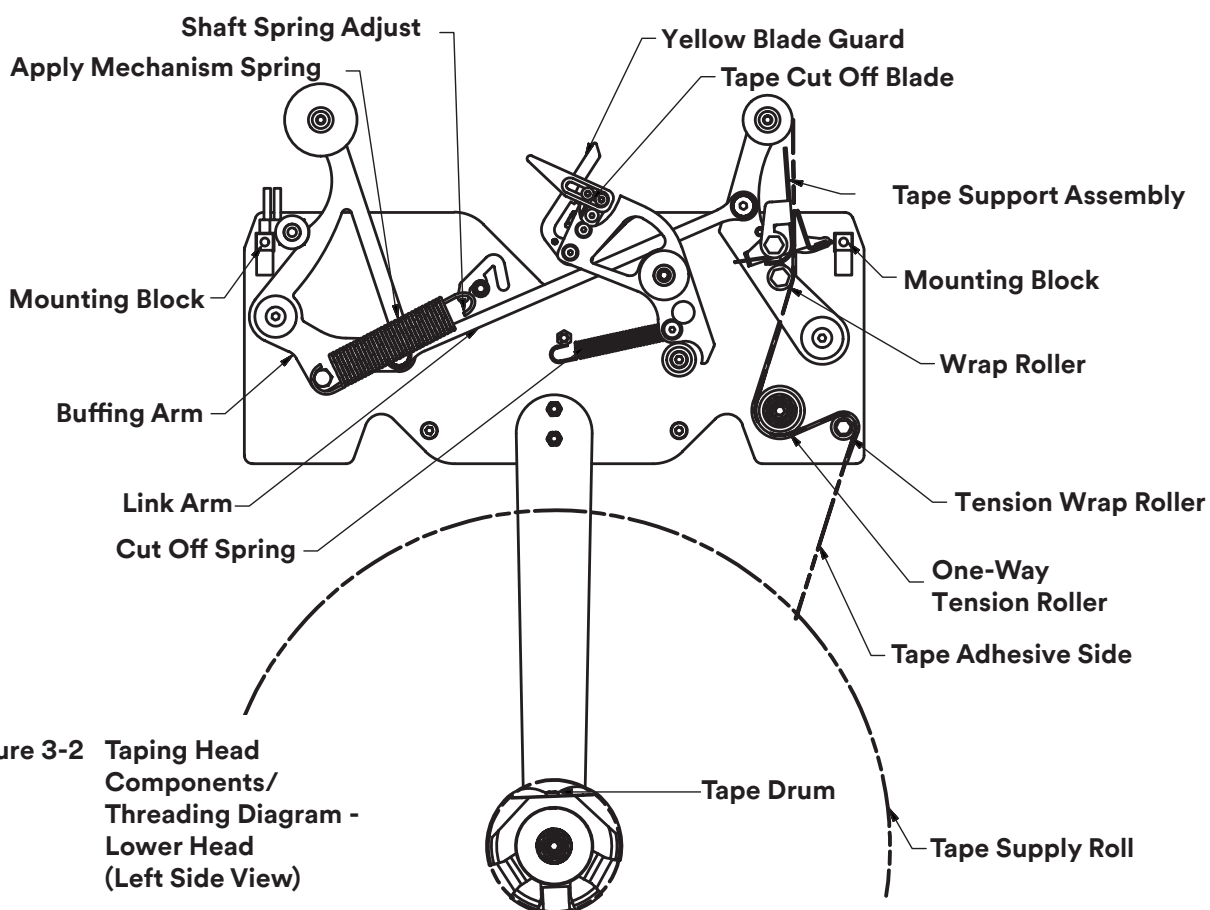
Taping Head Components/ Threading Diagram - Lower Head (Left Side View)
